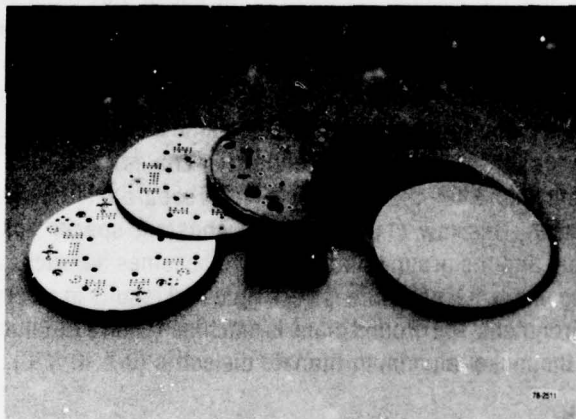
Exploded View of Test Antenna Showing Front View of Components, Test Antenna, and Antenna/Receiver
